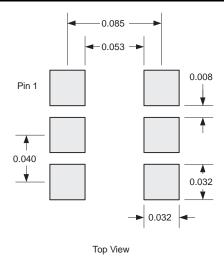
THS9001 Recommended Footprint (dimensions in inches)
